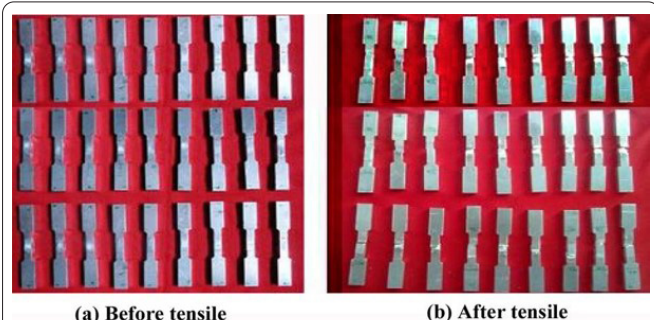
Representation of tensile specimen of (a) before and (b) after tensile specimen fractures.
